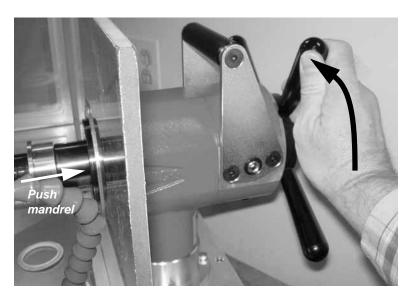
Turn the feed handle clockwise (viewed from the back of the machine) to thread the mandrel back into the feed nut. Push the mandrel in while you start the threads.
